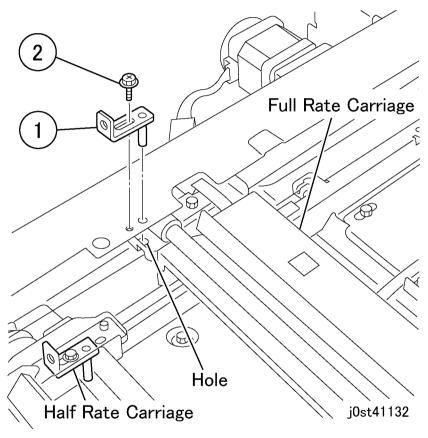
Position Adjustment of Full Rate Carriage 1/2 (j0st41132)
